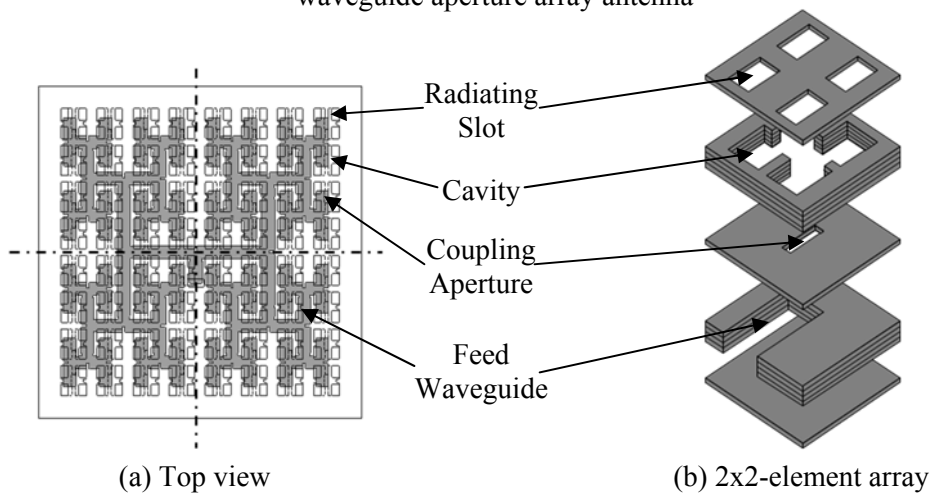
Top view of the antenna and exploded perspective view of the 2x2-element array
